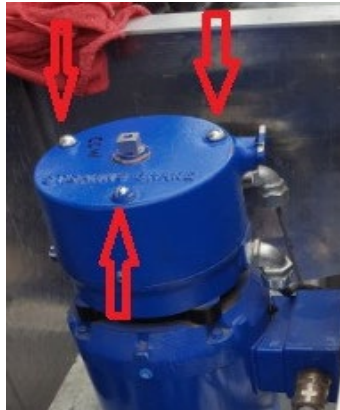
Cap-Nuts on Top of Brake Assembly
